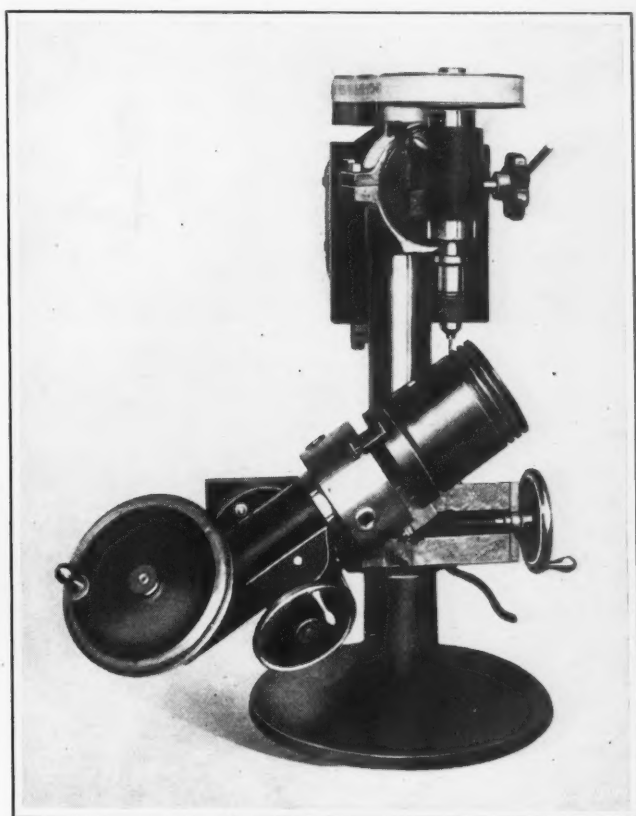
Machine set up for Drilling Operation, the Work-spindle being at an Angle and the Upper Spindle Vertical
